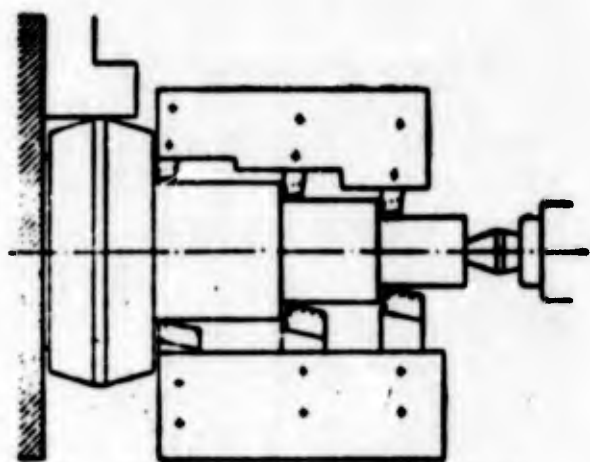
Arrangement of semiautomatic multi-tool lathe for rough machining of blank.
